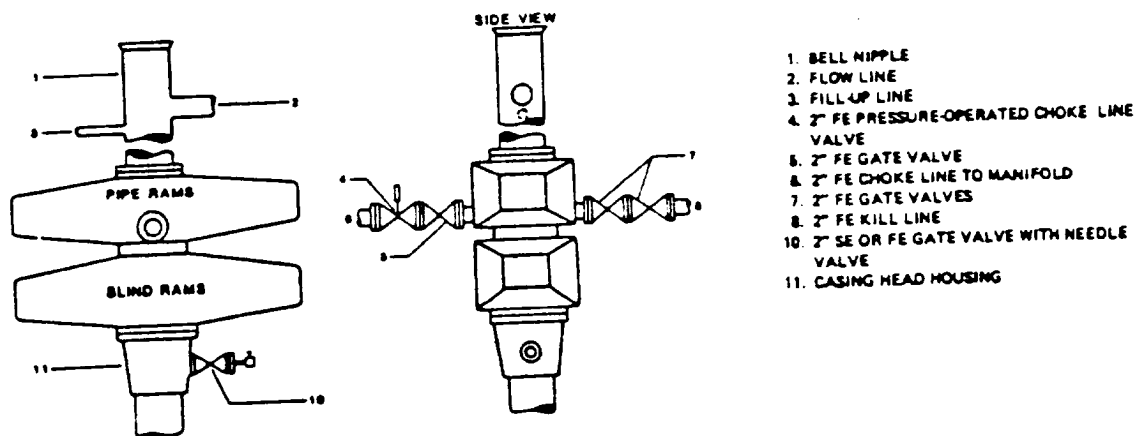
Standard Hydraulic Blowout Preventer Assembly (2 M or 3 M Working Pressure) Alternative 3 (without Drilling Spool)
